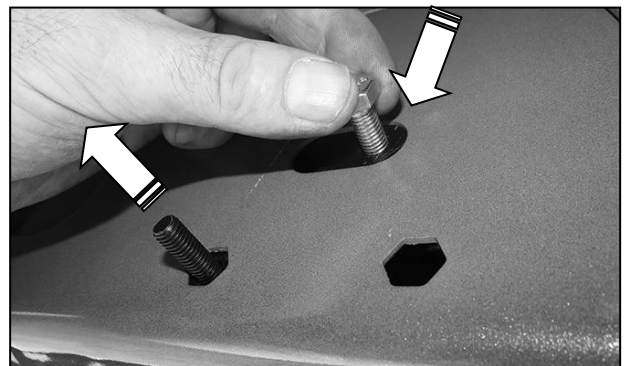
2009-mid 2015 Driver/Left front mounting location (No factory holes in pinch weld 2009-2011 models)
